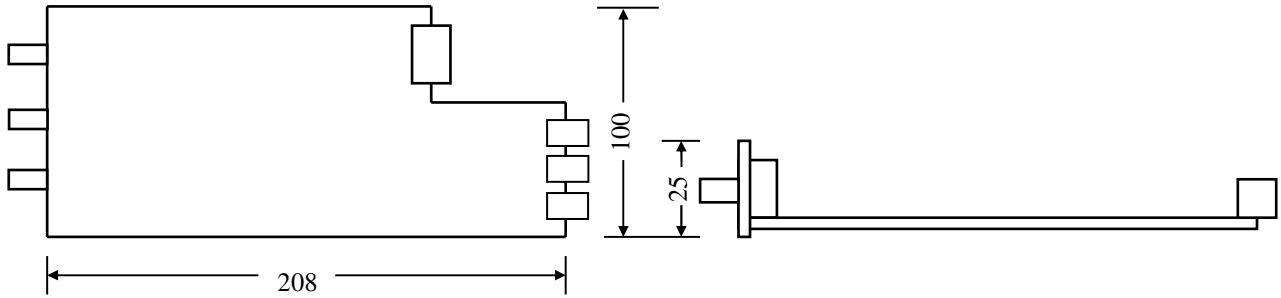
OSD8865R MOUNTING DIMENSIONS
